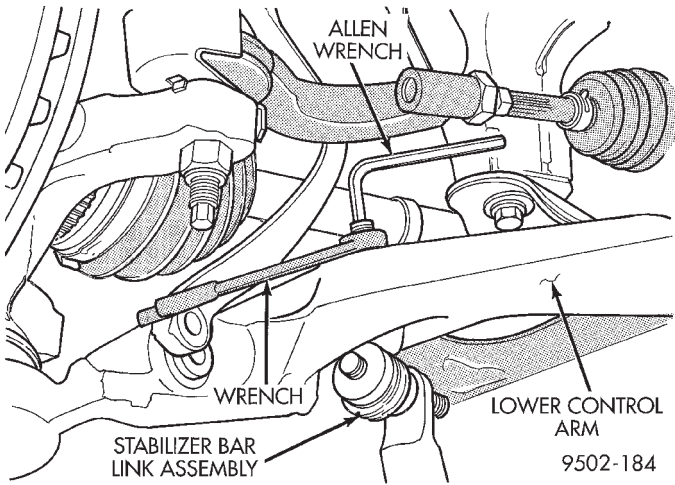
Stabilizer Bar Attaching Link Nut Removal
